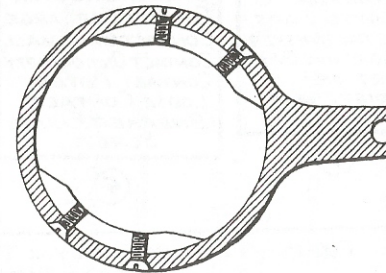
ANOTHER FORM OF CAM RING. Consisting of two steel pieces mounted on a brass ring and set at 180 degrees.
